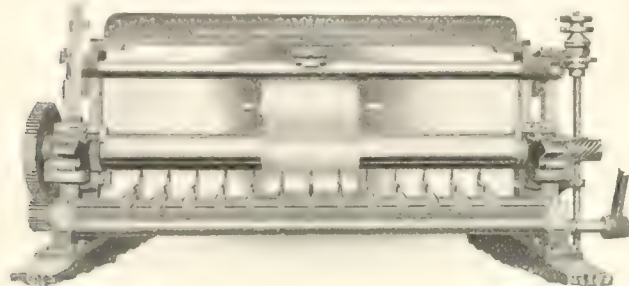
DETAIL OF CUTTING DISCS AND STEEL ROLLER.
